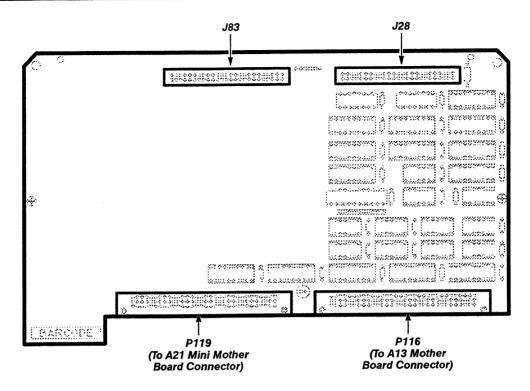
Removing/Replacing the A20 Digitizer I/O Board
